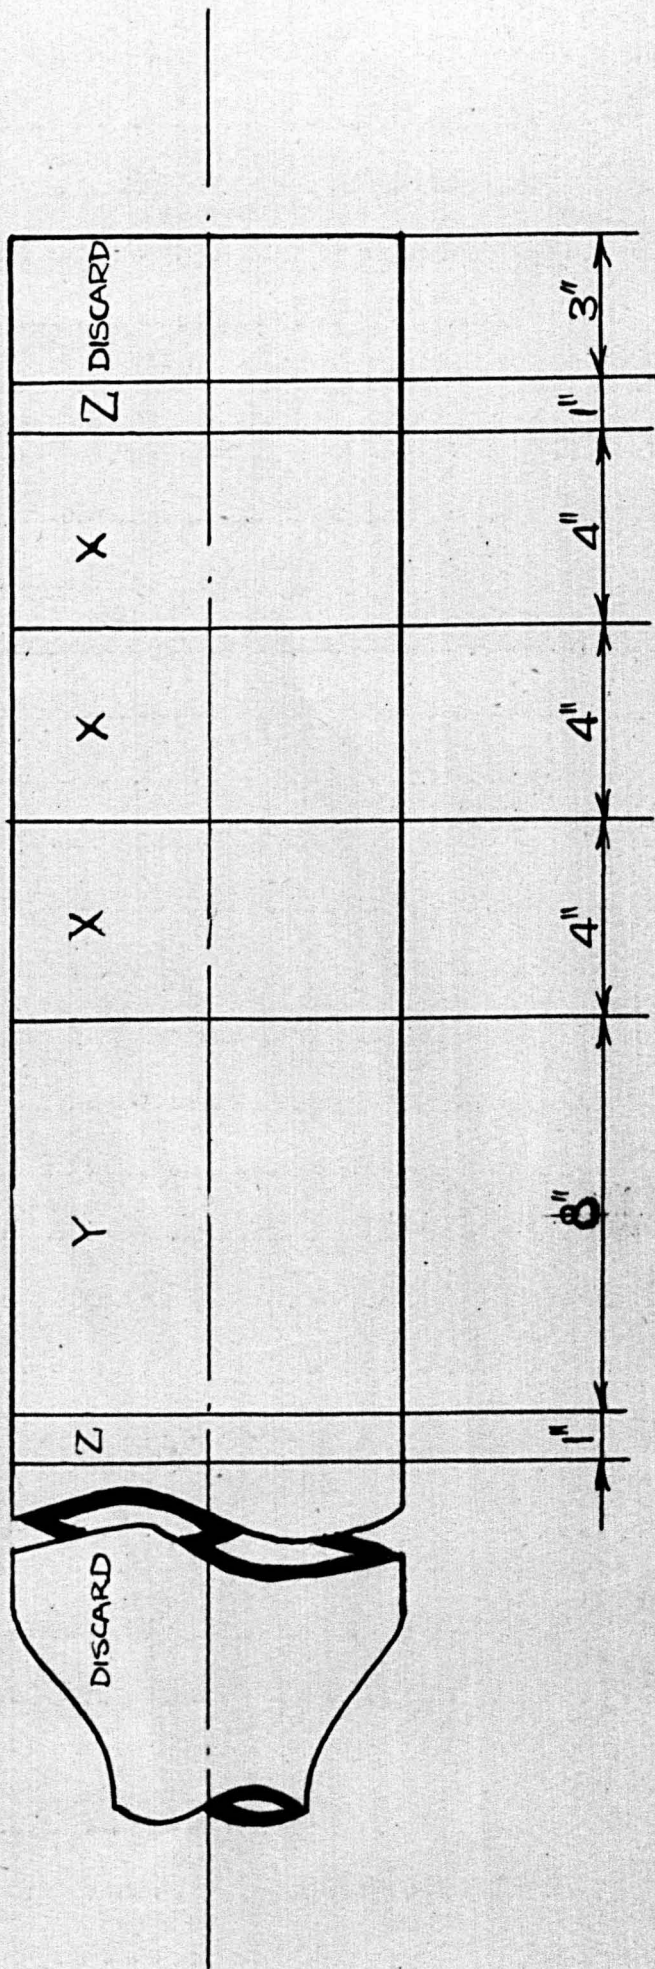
LOCATION OF SPECIMENS ON HOLLOW DRAWN TUBES
